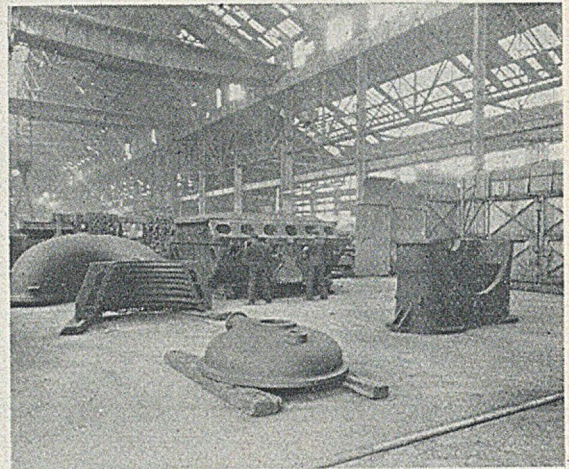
Several of the Heavier Type of Castings in the Despatch Section ready for Shipment.
